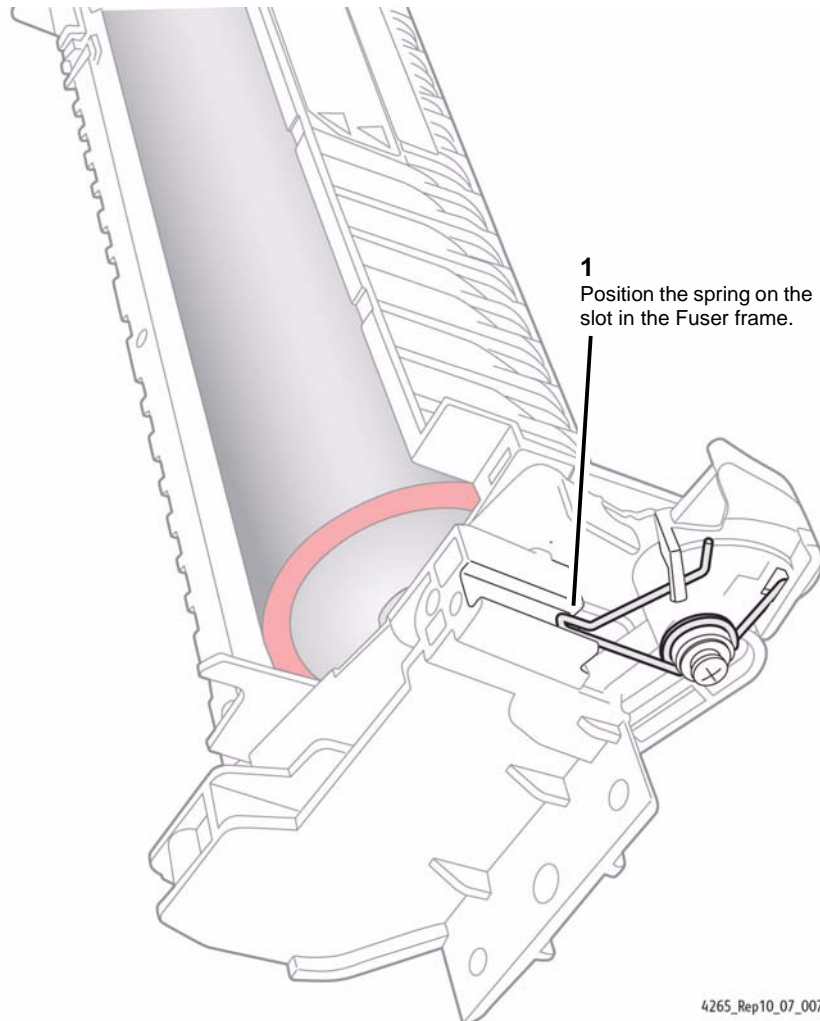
Positioning the Front Jam Lever Spring on the Fuser Frame
